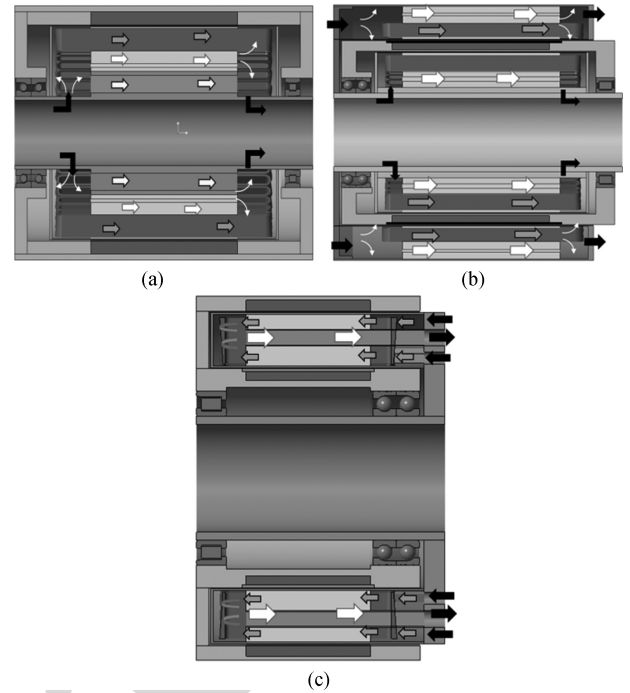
General housing design and cooling configurations for OR, DS, and DR topologies. (a) Outer rotor machine design. (b) Double stator machine design. (c) Double rotor machine design.
